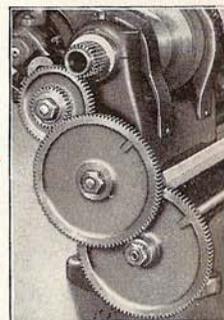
Gears Arranged for R.H. Automatic Longitudinal Power Feeds.
